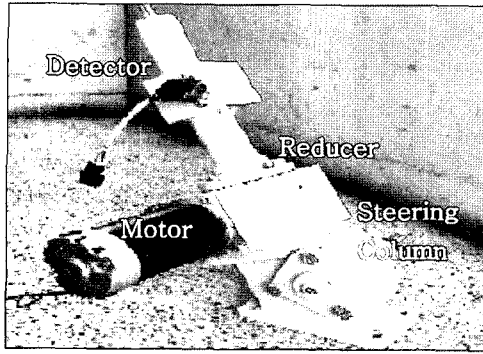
Mechanism assembly photo of electronic power steering control system.
